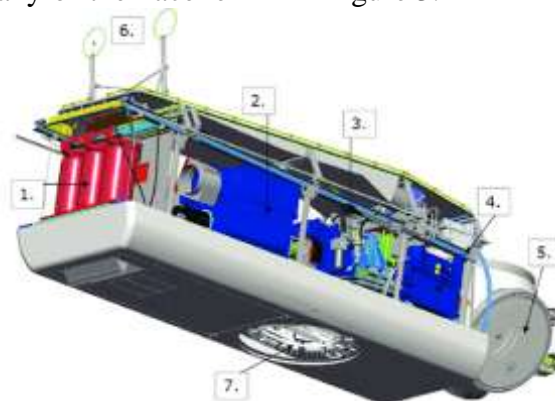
Parts of the nacelle: 1, transformer; 2, alternator; 3, gearbox; 4, hydraulic equipment; 5, blade pitch regulation system; 6, weather sensors; 7, yaw system.
